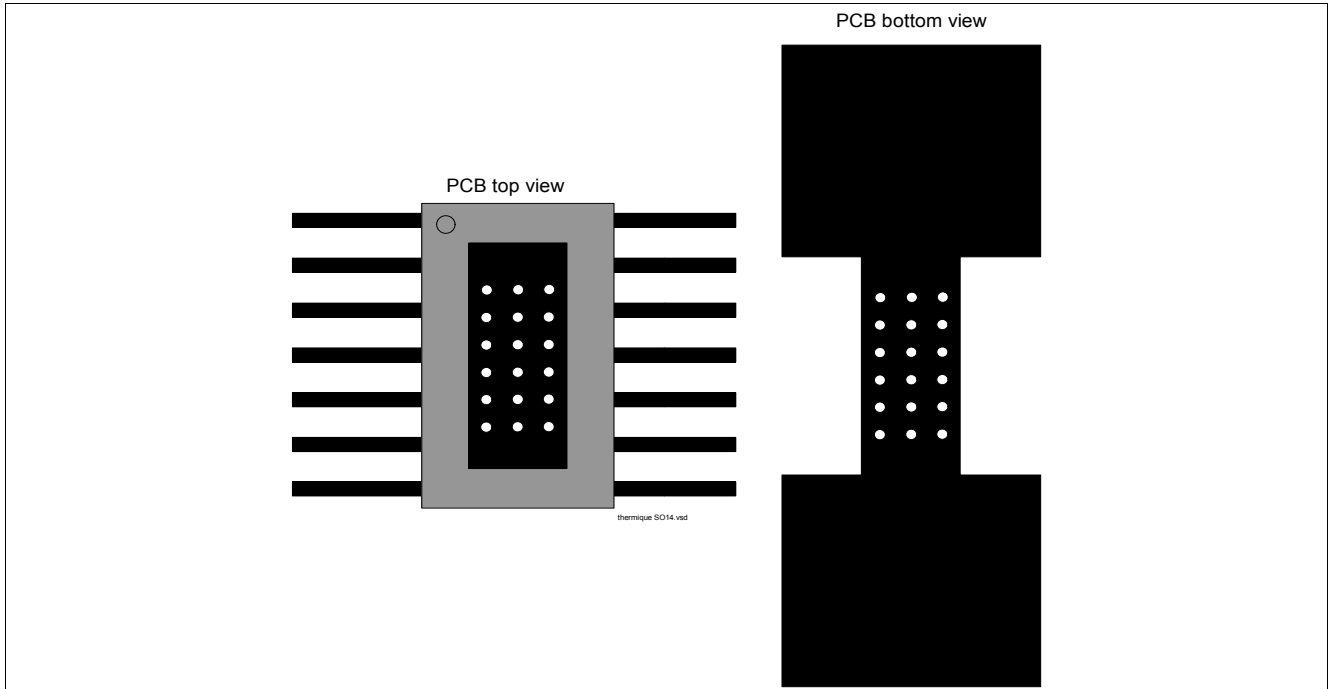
PC Board Top and Bottom View for Thermal Simulation with 600 mm² Cooling Area
